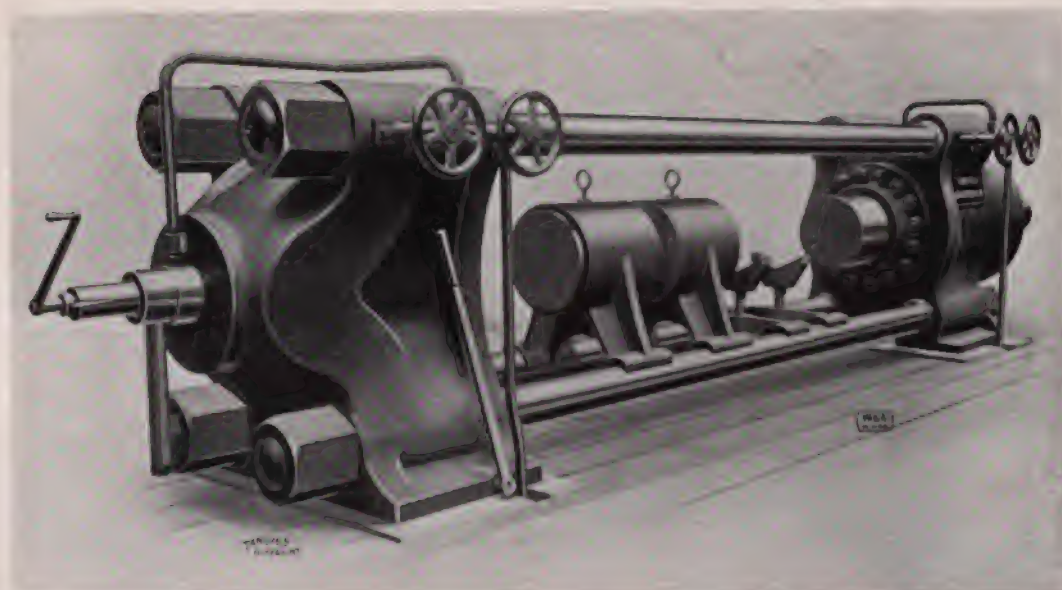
TUBE-TESTING MACHINE, BY MESSRS. TANGYES, LTD.
